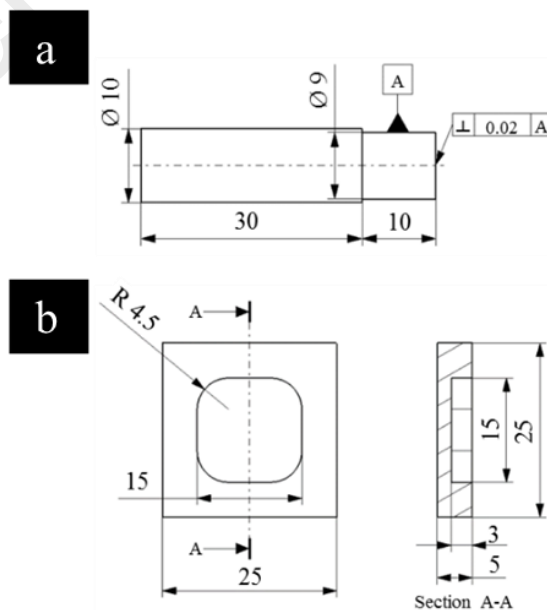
Illustration of (a) tool (electrode) and (b) workpiece
